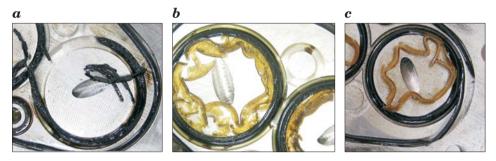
Gear pump seal failures: a – torn gear wheel seal off, b – fused sealing rings, c – torn big seal on the rear end plate ("stadium")
